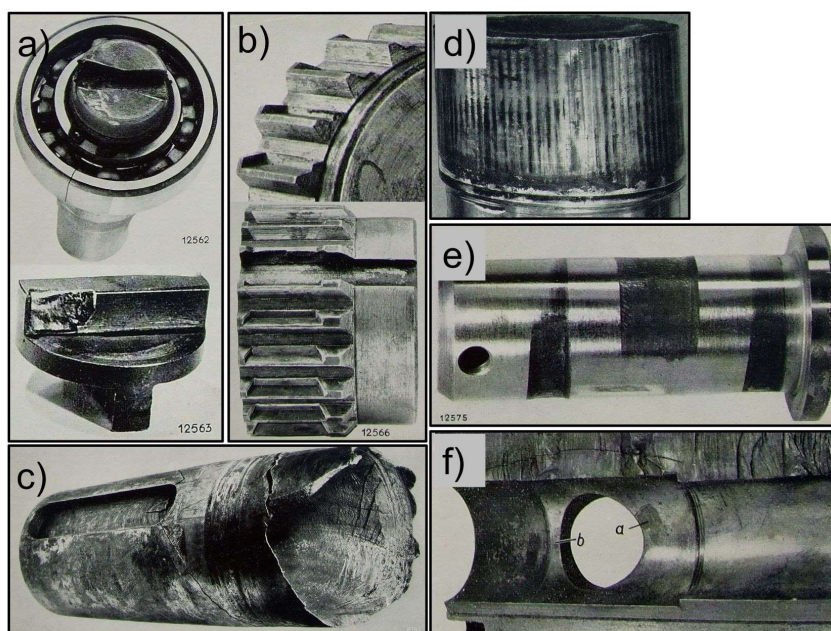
Roundup of machine element fretting wear damages. a) cross ledge coupling, b) tooth coupling, c) shaft seat with key way, d) bearing seat, e) shear bolt, f) cylinder wall of a compressor. Source of image: [Bar65]
